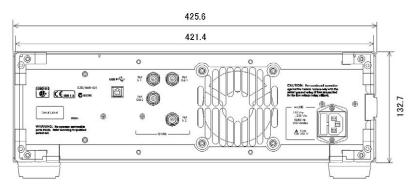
Dimensions (rear view, in millimeters, nominal)
